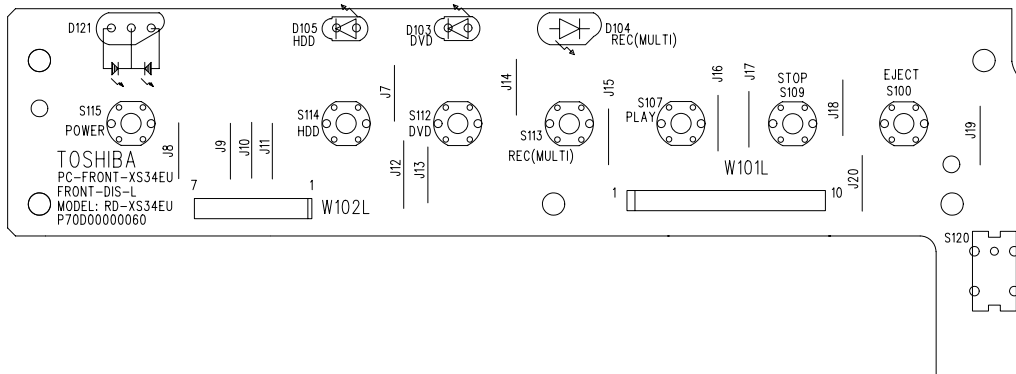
EU03B Front (L) PC Broad (Top side)
